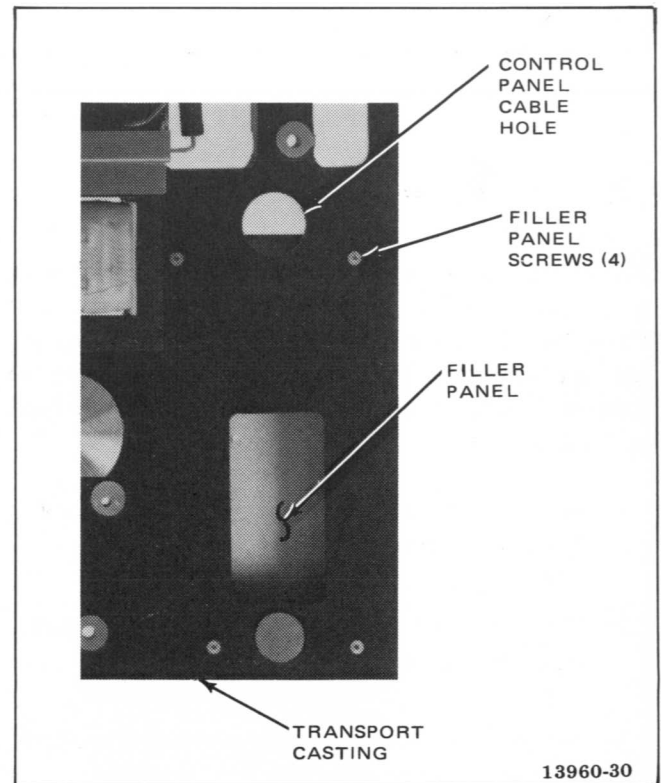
Rear View of Filler Panel (Transport Components Removed for Clarity)
